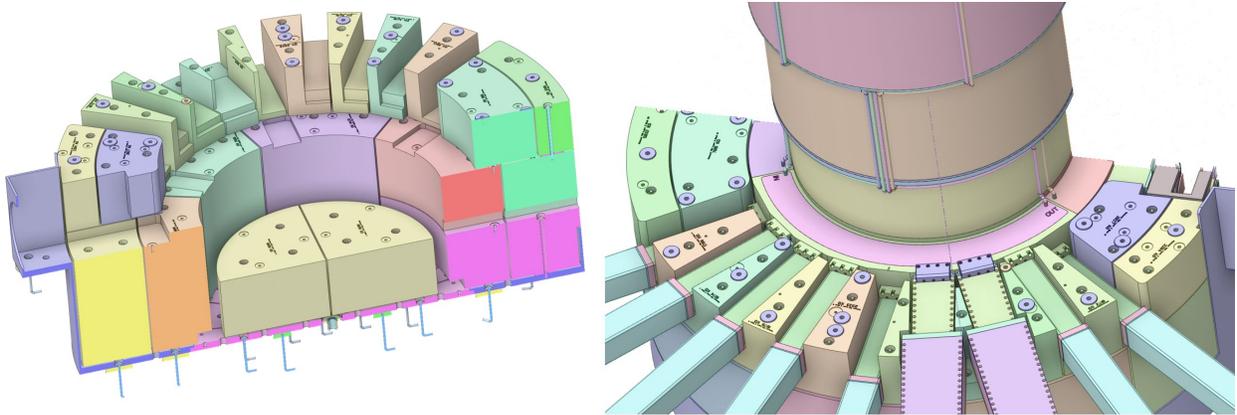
Cross section views of the bulk shielding assembly up to Layer 2 both with (right) and without (left) the CV
